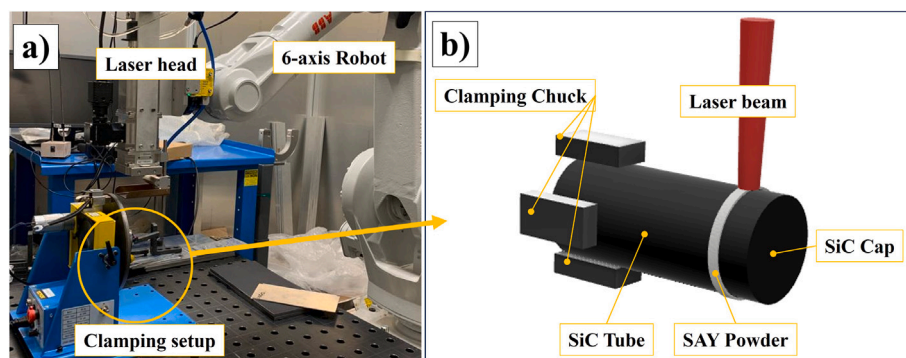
Laser joining set up (a) and rotation device for tube/end-plug joints (b) at J-Tech@PolITO.
